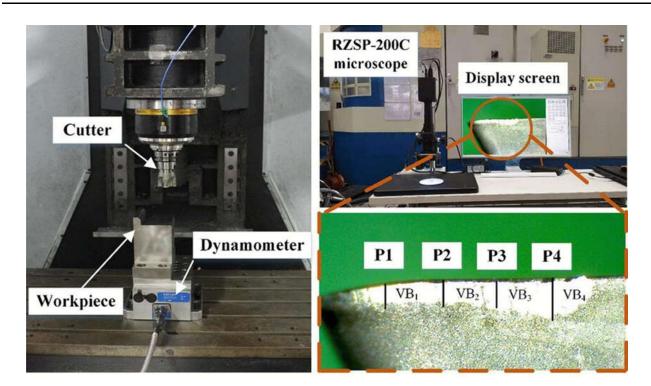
(a) Experiment setup (b) Tool wear measurement Optimized Machining
